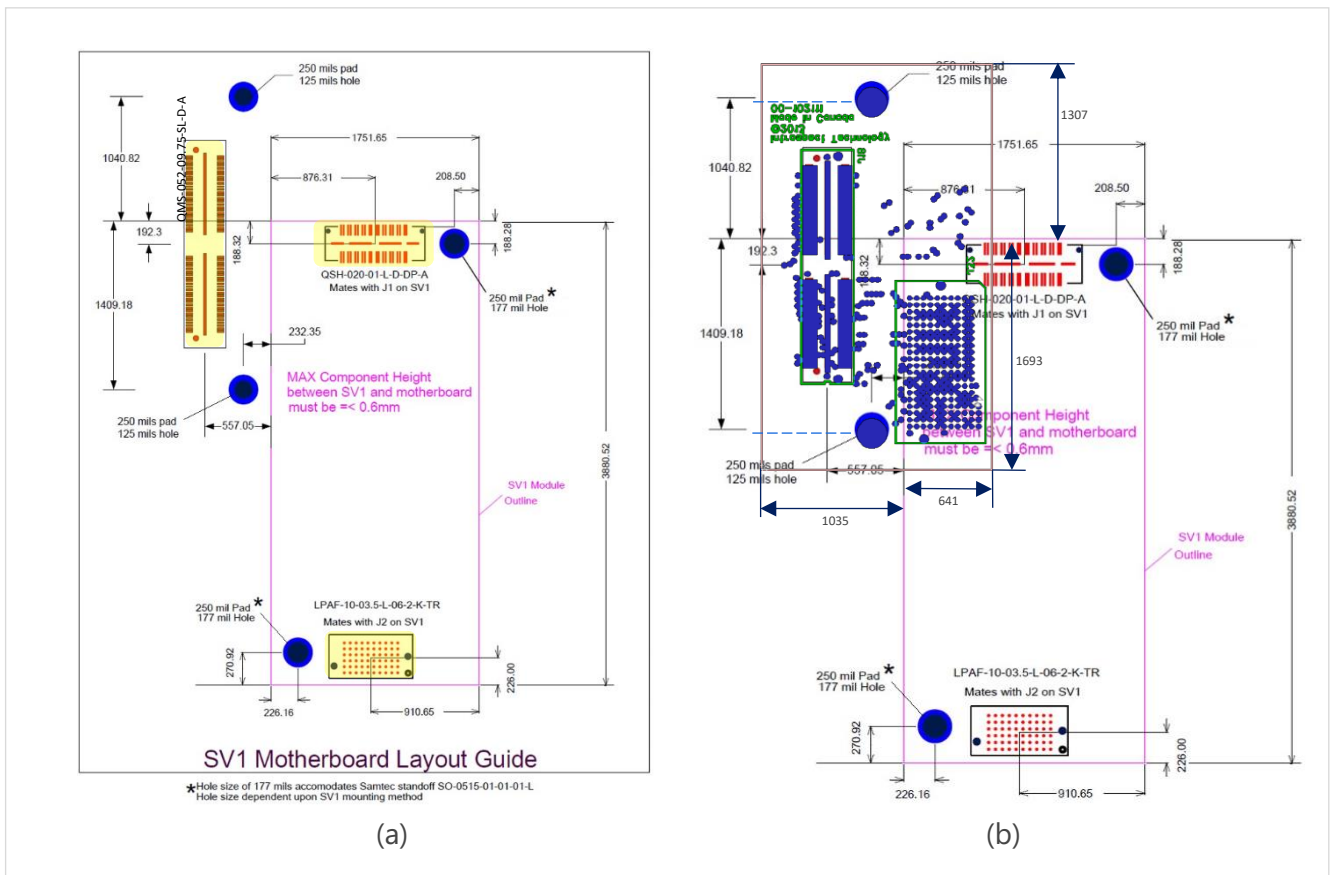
(a) Motherboard layout requirements depicting the connector and mounting hole footprints of the SV1D (pink outline) (b) Top view of the SV1B adaptor board location (brown outline) relative to the SV1D
